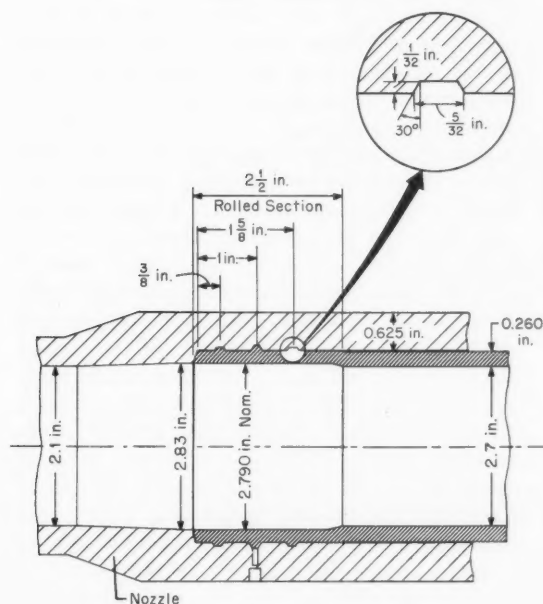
NPR inlet rolled joint.<sup>5</sup>
